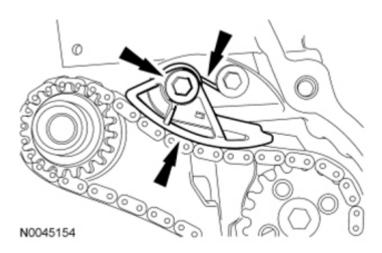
Locating Oil Pump Drive Chain Tensioner, Bolt And Tensioner Spring Courtesy of FORD MOTOR CO.
